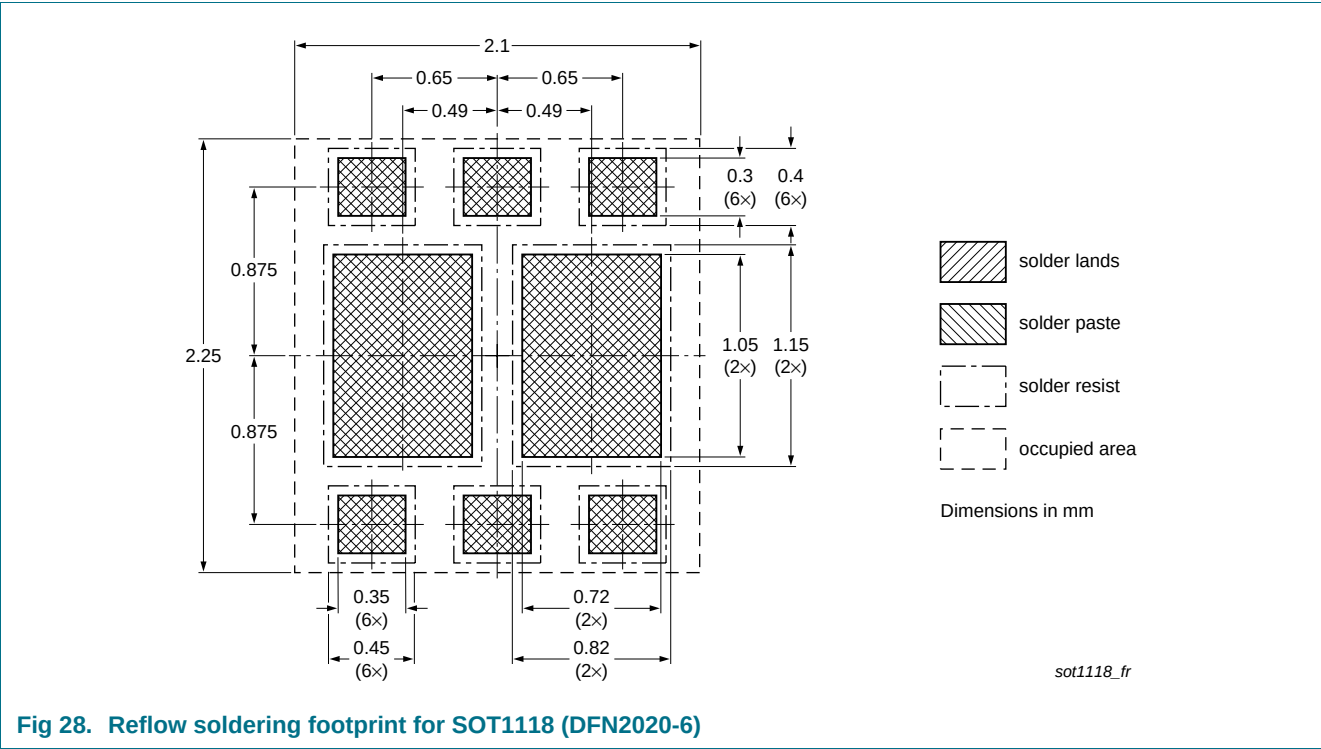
Reflow soldering footprint for SOT1118 (DFN2020-6)
